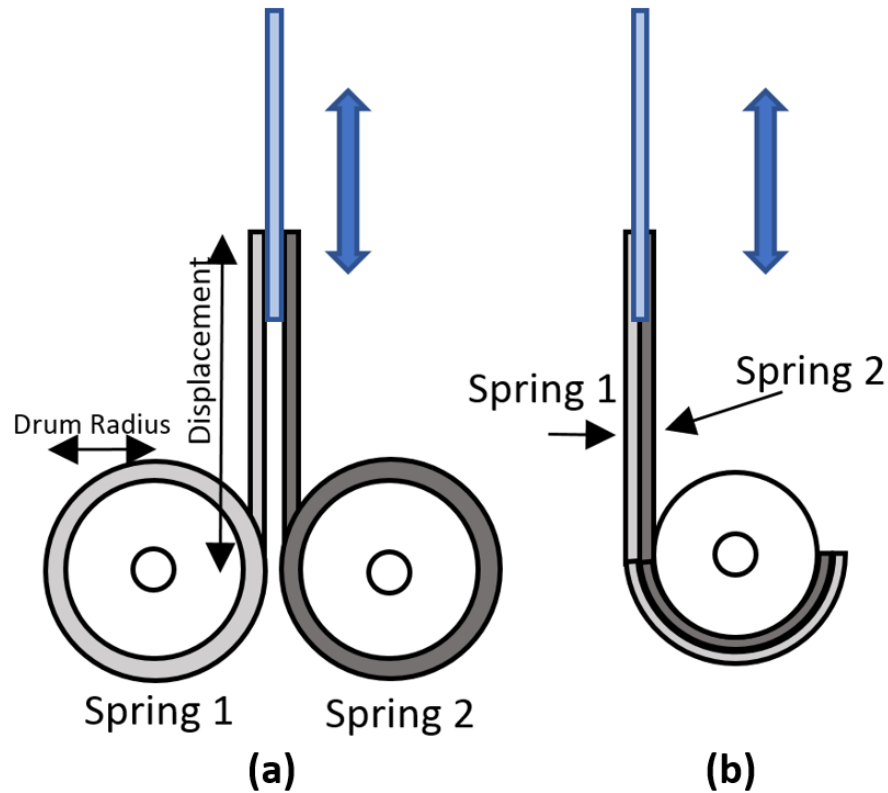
Two multiple-spring mounting configurations. (a) two springs mounted back-to-back on separate drums.(b) two springs double-wrapped on the same drum.
